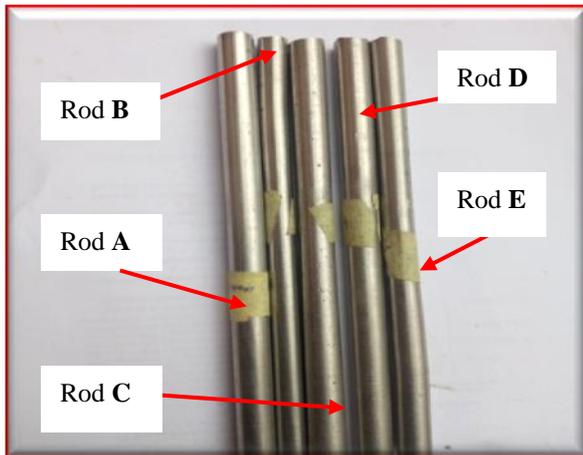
Plate II: The cast-fabricated Al-Si-Fe alloy rods after trimming their surfaces
